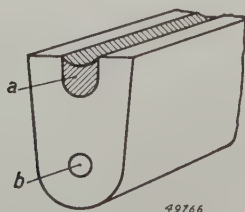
Section of one of the ceramic rods used in the new mounting technique in the place of the glass beads. *a* is a channel filled with sintered glass. The opening *b* is for a supporting pole, which is afterwards welded to a lead pin.
